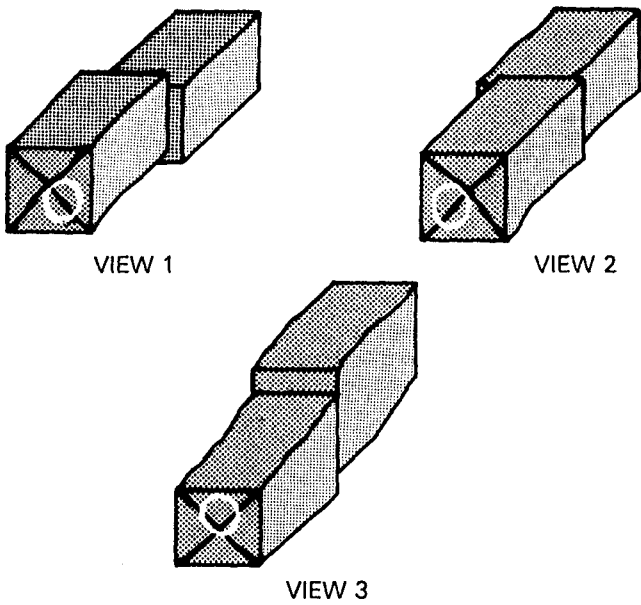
Schematic View of Orbital Friction Welding. Three Consecutive Views Taken at 120 Degree Intervals
